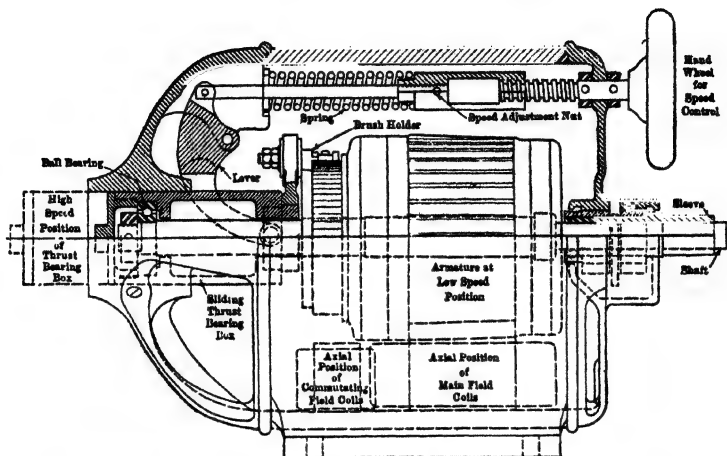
Sectional view of Reliance adjustable-speed motor.
